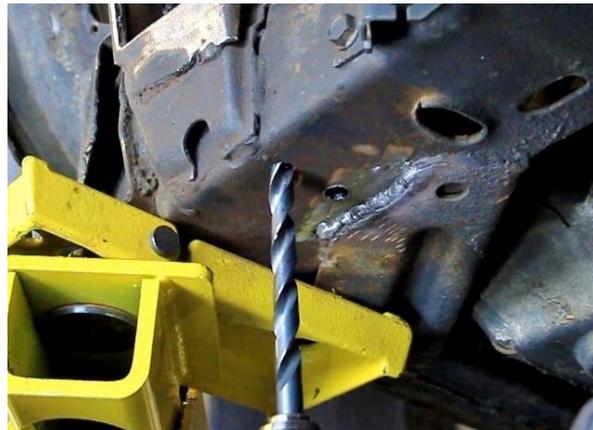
Drill Trailing Arm Bracket Mounting Locations
